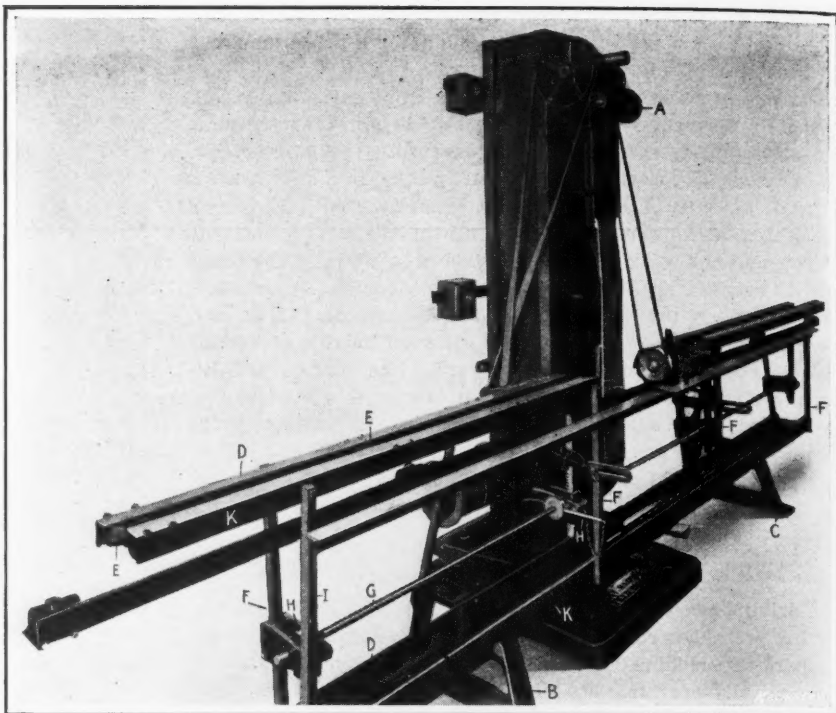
Rear View of Blevney Abrasive Belt Polishing Machine shown in Fig. 1
